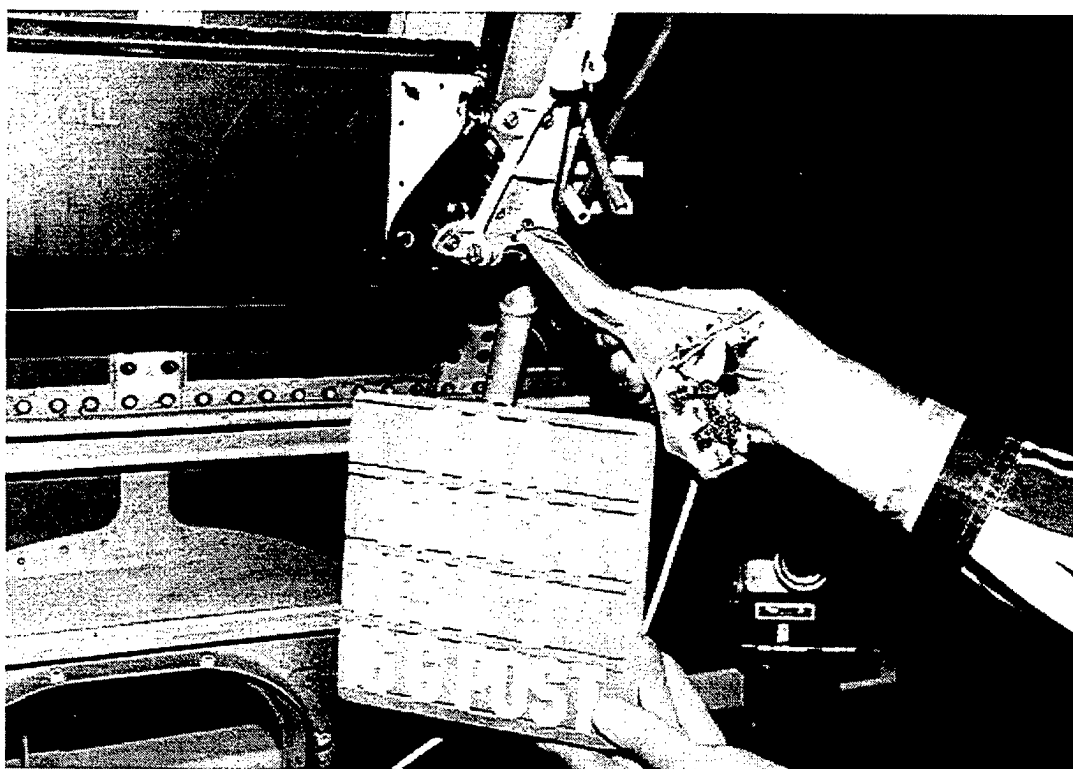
POSTTEST BIN A FRONT LOWER SUPPORT VIEW 2
